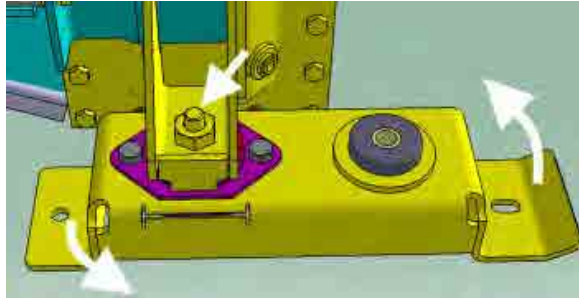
MOUNTING SUPPORT IN INITIAL POSITION
